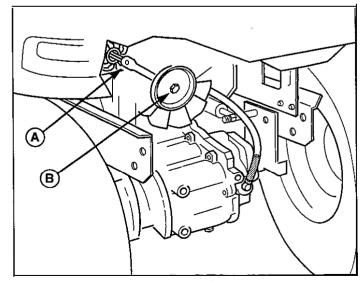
Remove Hydro Fan & Shaft Assembly A. Setscrew
